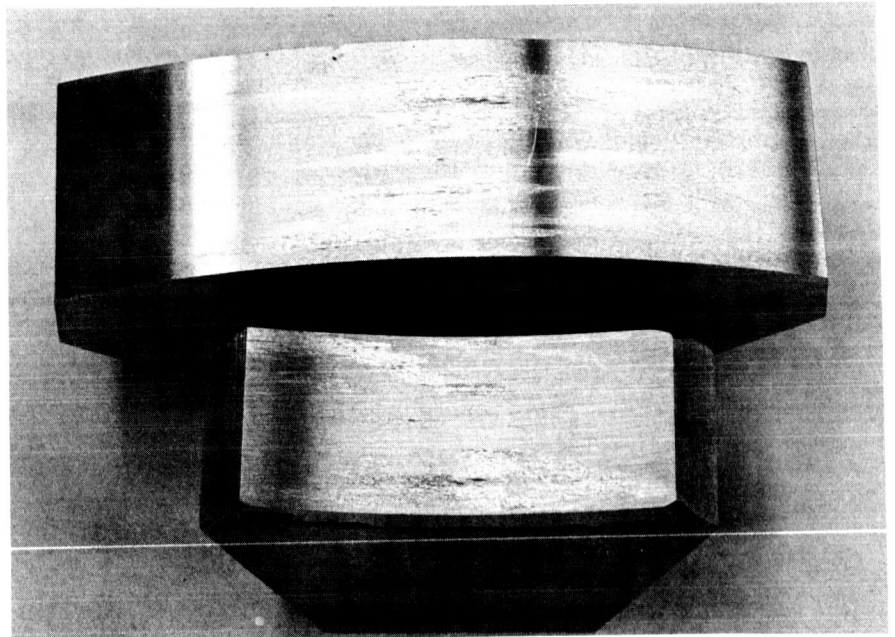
BALL JOINT TEST SPECIMEN TYPE - 8;
